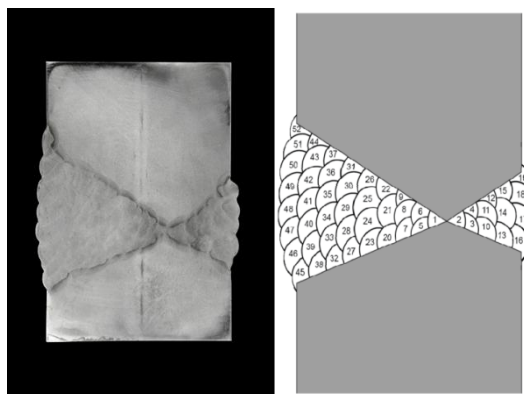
Transversal macro section and buildup sequence of the welding seam
